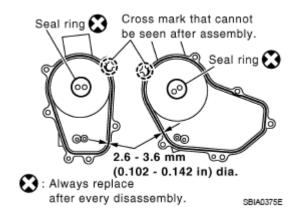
Identifying Intake Valve Timing Control Covers Sealant Area Courtesy of NISSAN MOTOR CO., U.S.A.
